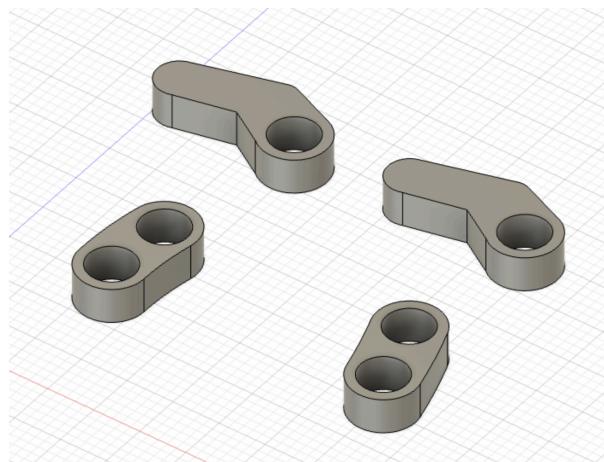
Initial CAD model of the mechanical linkage used to actuate the butterfly wings.
